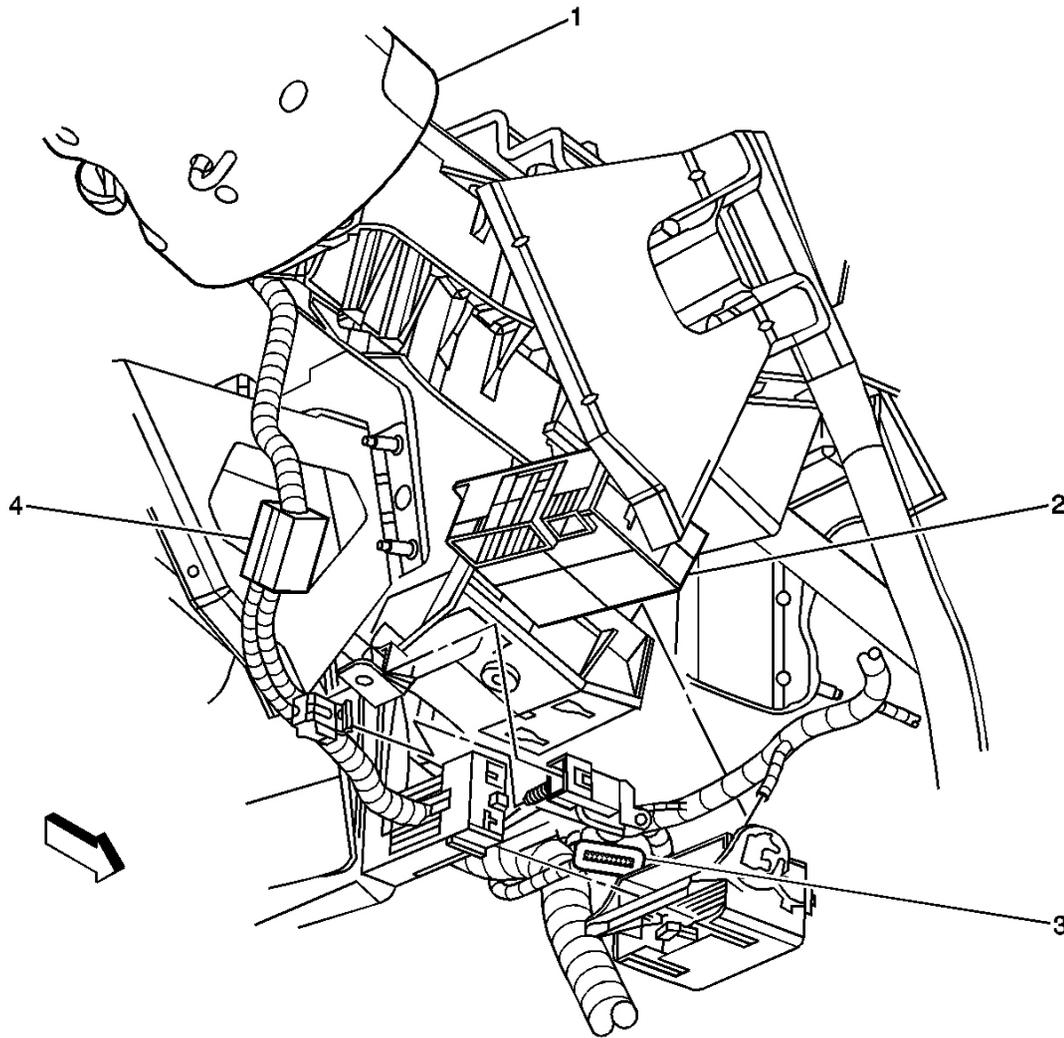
Steering Wheel Controls Backlight Fuse Component Views
